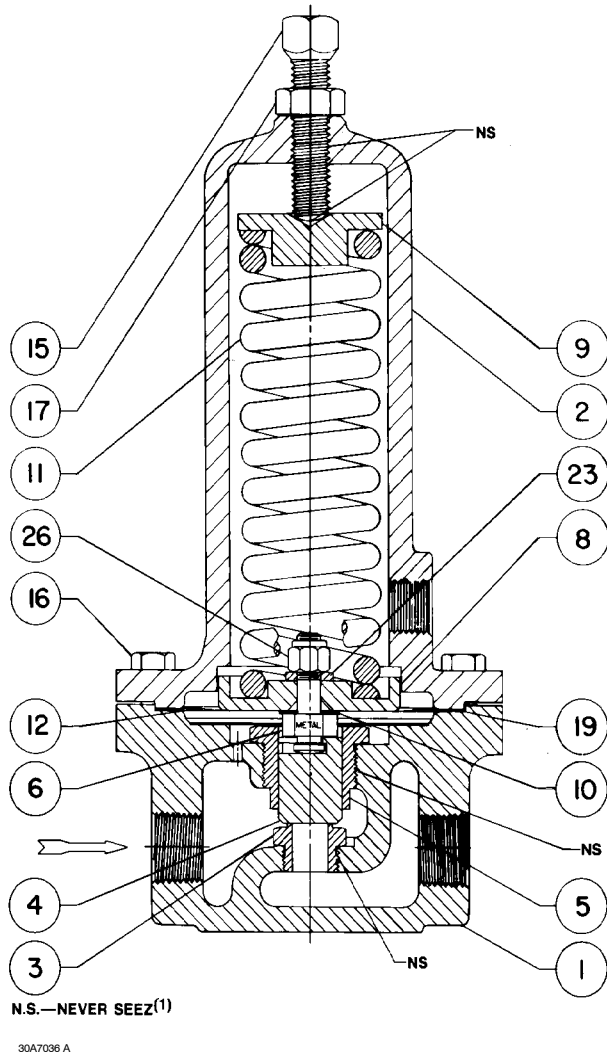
Type 98HH Relief Valve Assembly with Metal Seals
